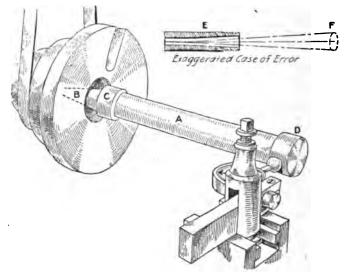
TESTING ALIGNMENT OF CENTER BEARING WITH LATHE SPINDLE
